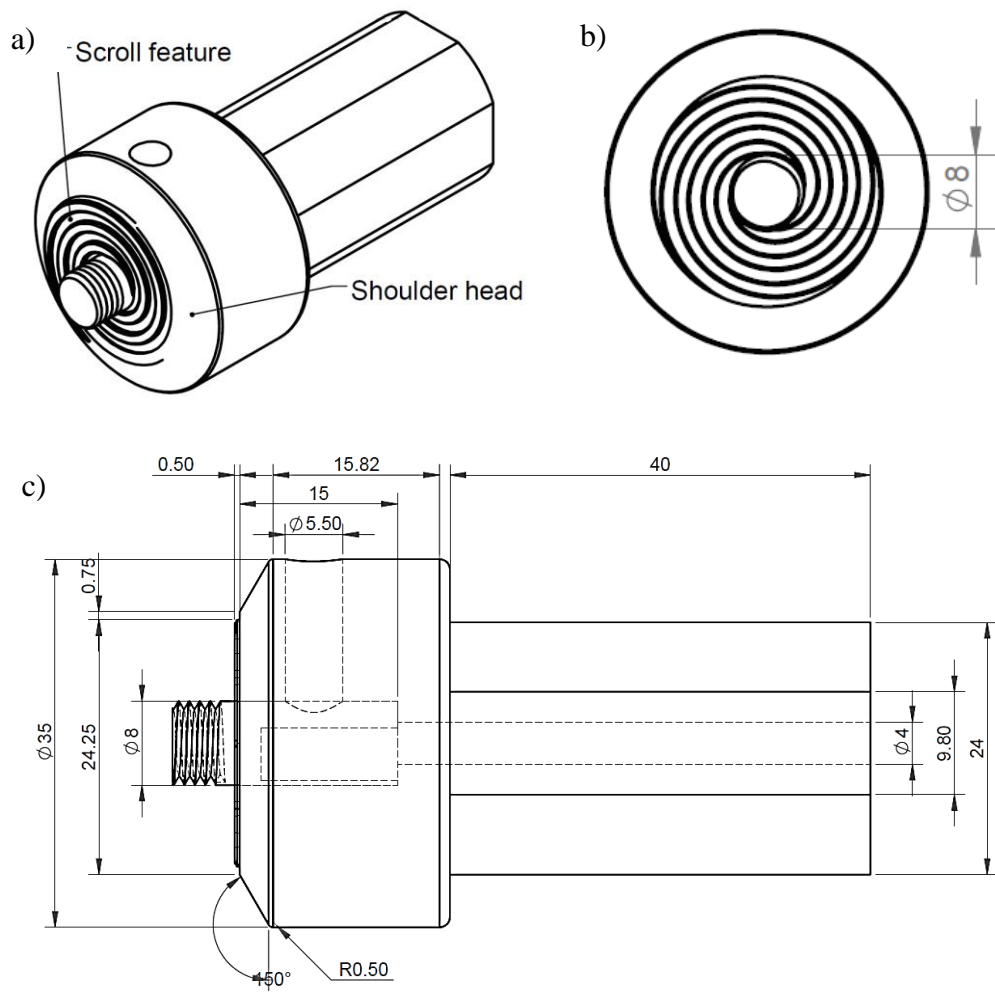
12 (a) Scroll shoulder tool with shoulder head; (b) scroll feature; (c) Tool dimension.
